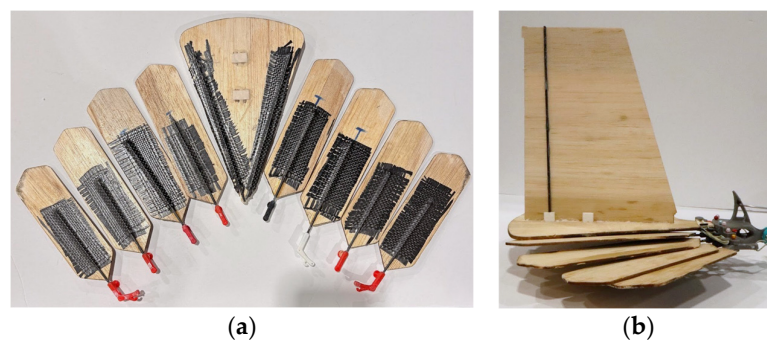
(a) CF wet layup on tail feathers; (b) side view of tail assembly.
